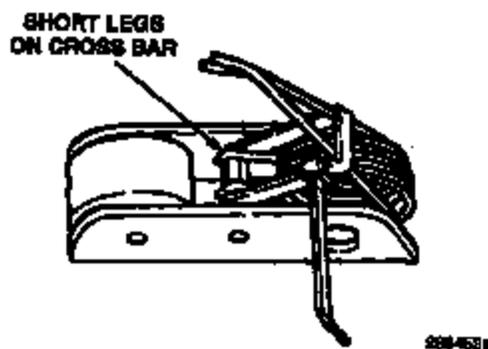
Spring Pack Properly Installed in Roller Assembly
